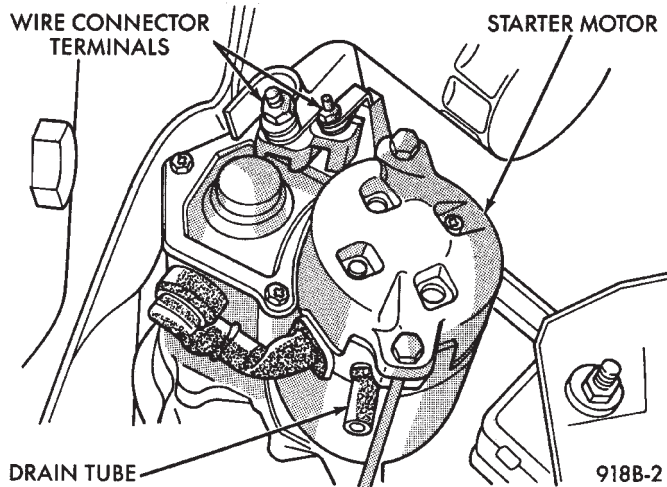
Remove or Install Attaching Bolts—Typical
